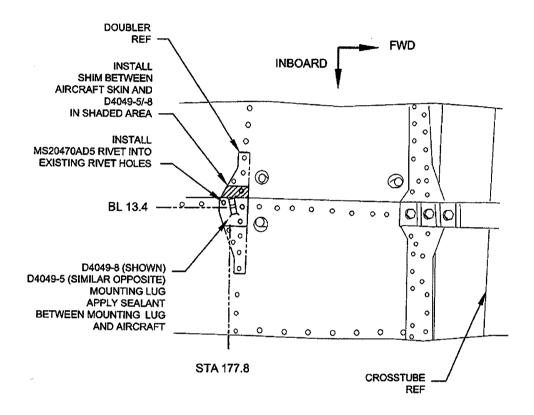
Section J-J (New Hard Point Installation at STA 177.8)
